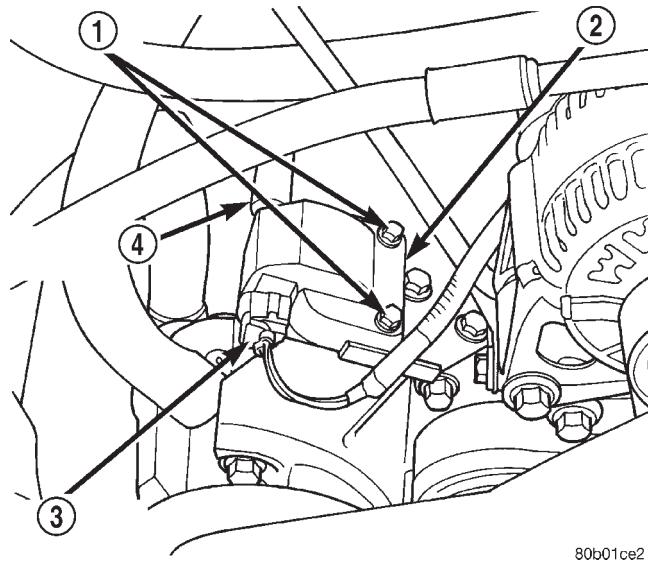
Ignition Coil—5.9L V-8 HDC-Gas Engine
